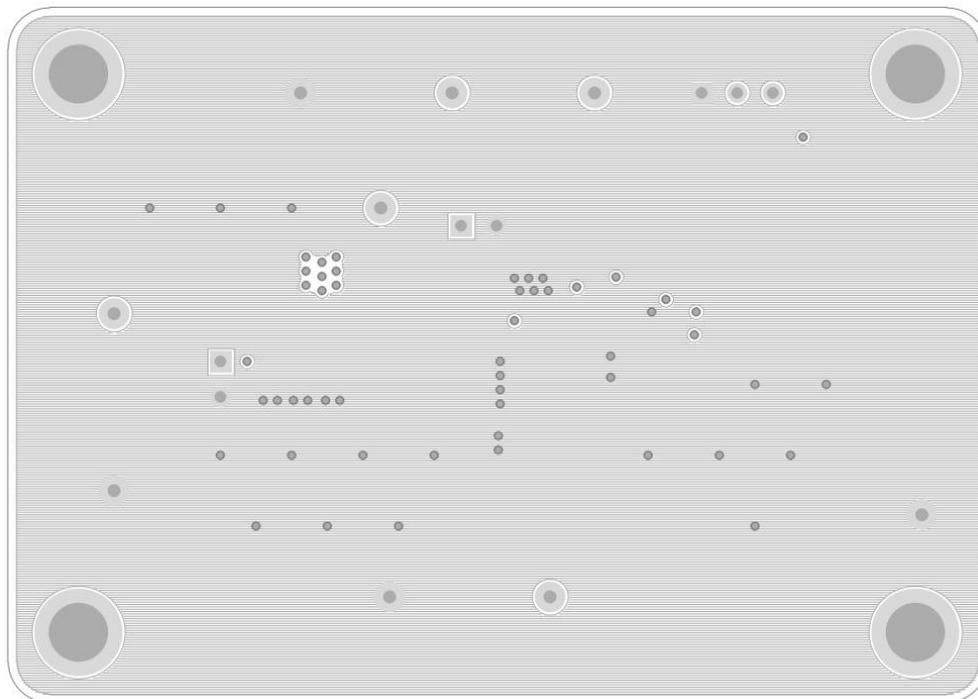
PCB Layout—Inner Side (2<sup>nd</sup> Layer)
